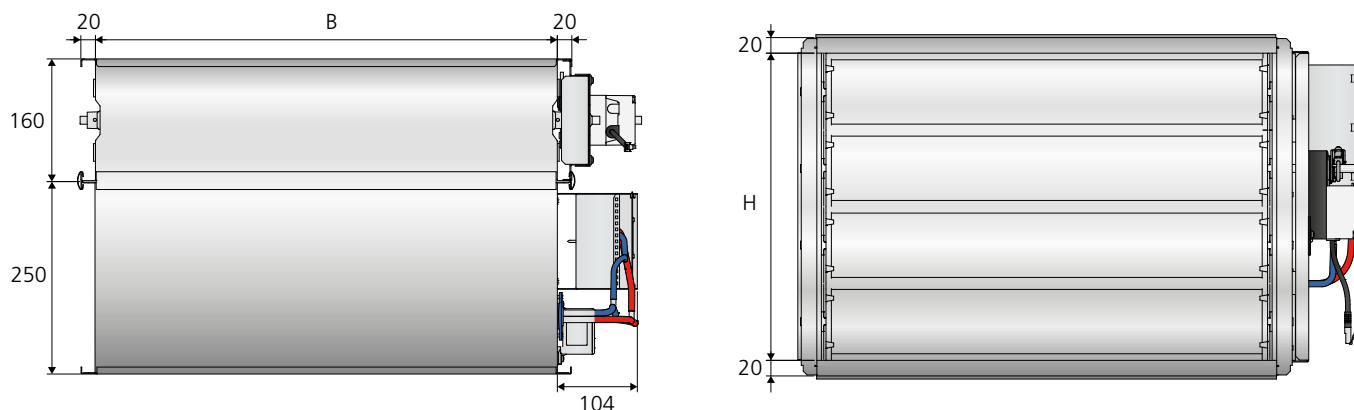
Dimensions, WISE Damper rectangular and WISE Damper rectangular with spring return.
